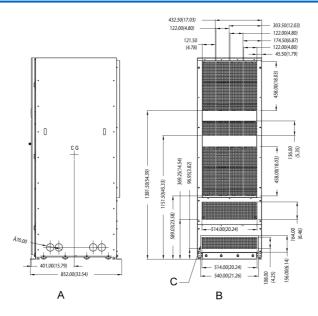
UPS cabinet dimensions 93E UPS 160-200 kVA (back and right side views)
